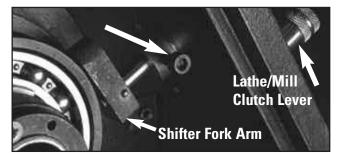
Loosen the cap screw from the lathe-mill clutch lever
